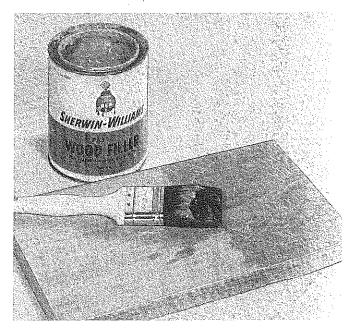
Paste wood filler being used to fill pores of open-grained wood.
